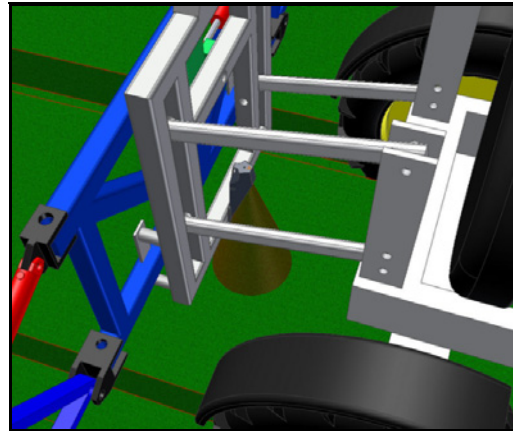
Main Lift Sensor Bracket Mounting Position (Side View)
